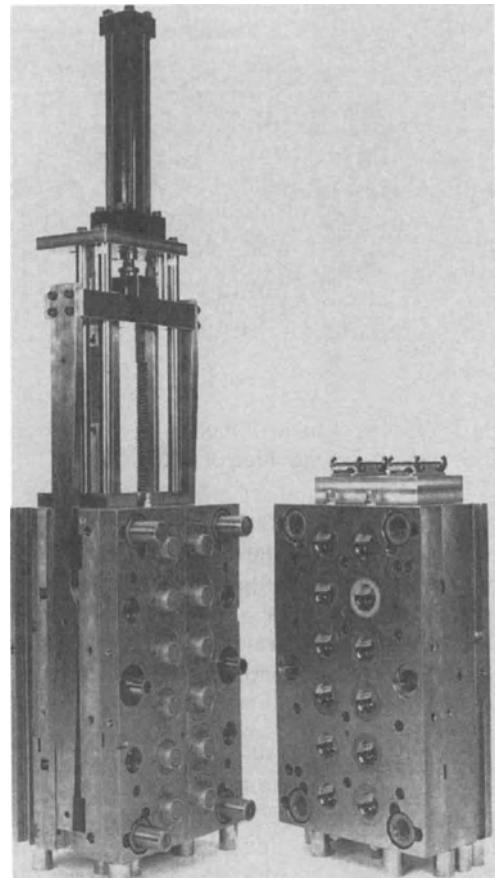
Rack-and-pinion unscrewing mold for tamper-evident closures incorporates 12 rotating-core cavities.
